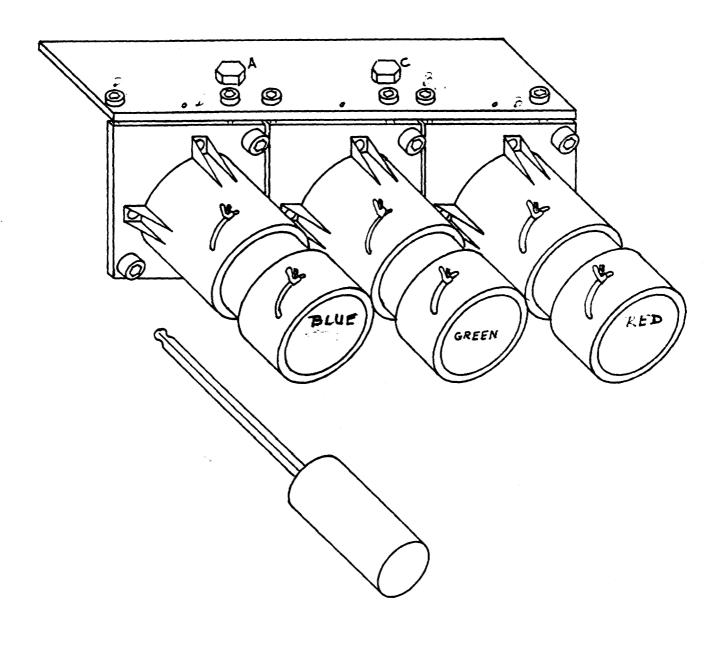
THE BCP 3000 LENS ASSEMBLY
